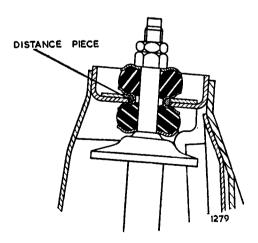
When refitting an Hydraulic Damper ensure that the distance piece is in position.
